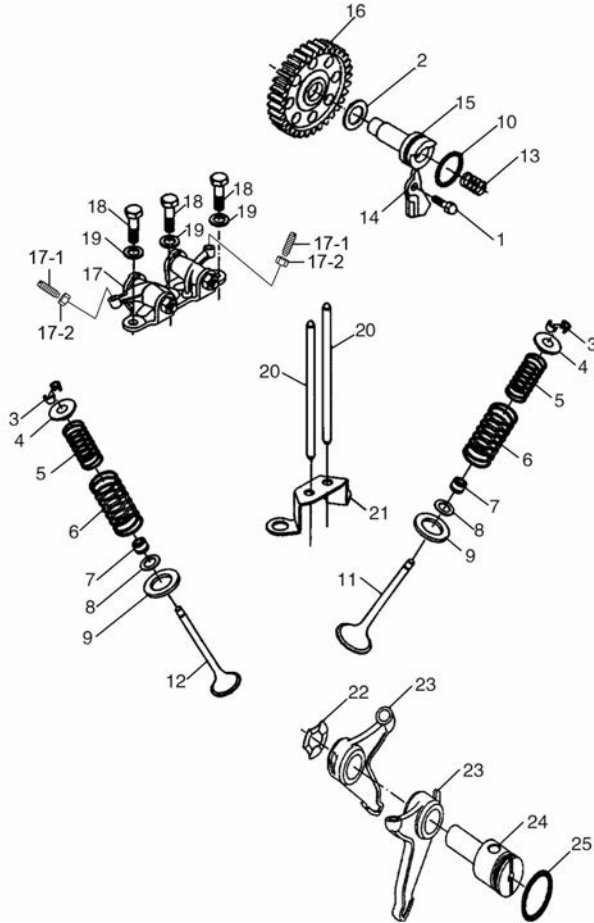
CAMSHAFT-VALVE (P03-S070-0022)
